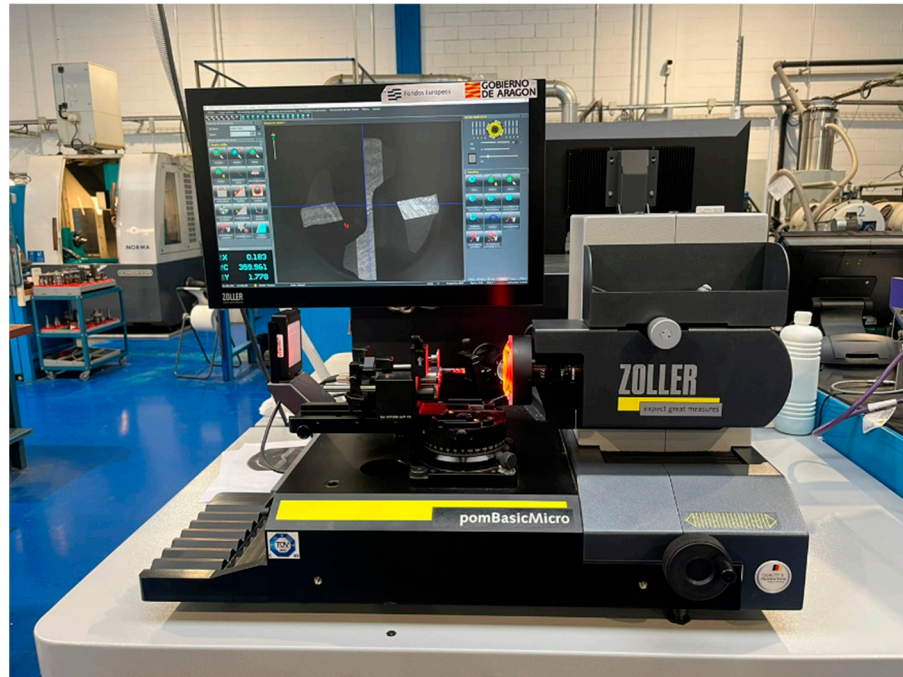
Optical inspection machine used to measure the wear in the milling tools.
